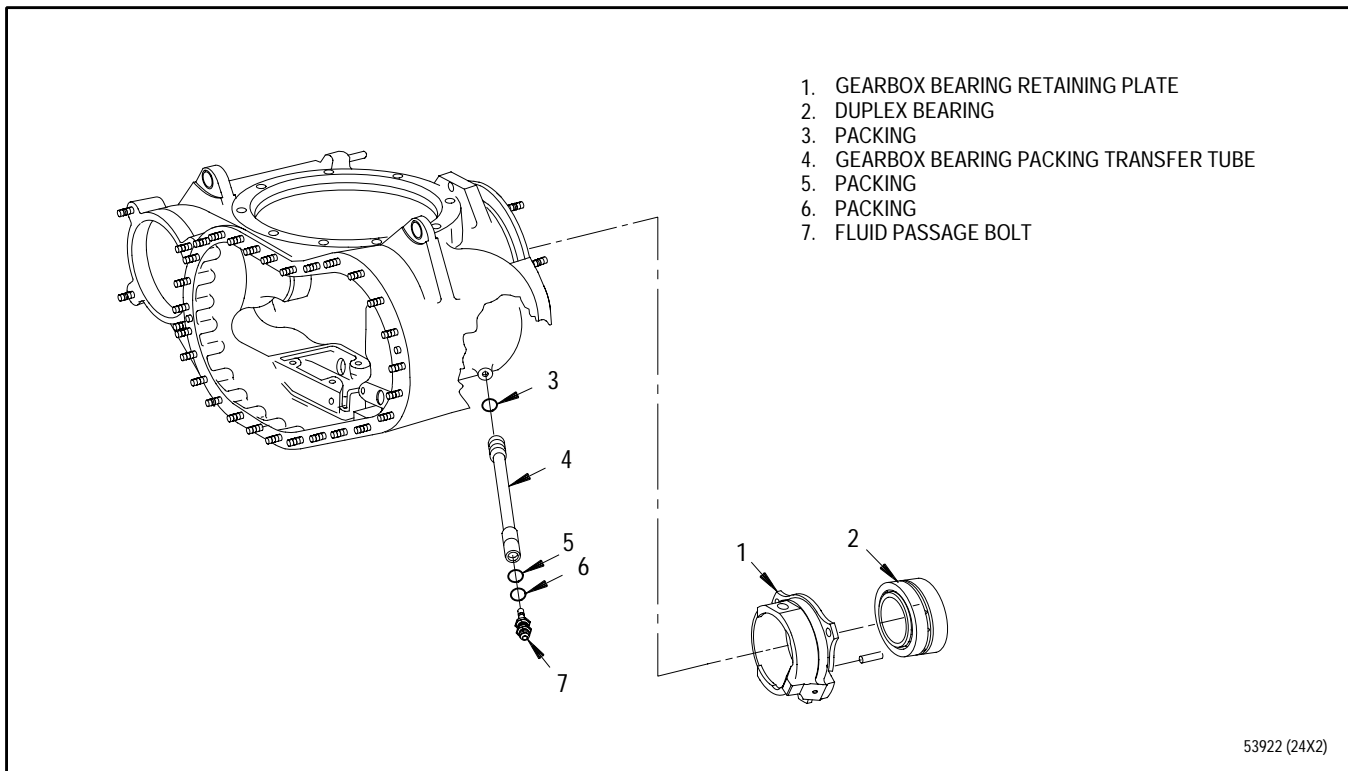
Bearing Assembly and Gearbox Bearing Packing Transfer Tube - Removal
